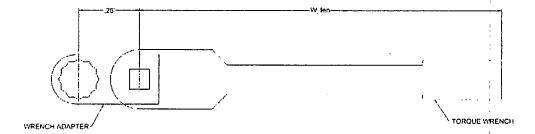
Wrench Adapter and Wrench Torque Arm Dimensions
